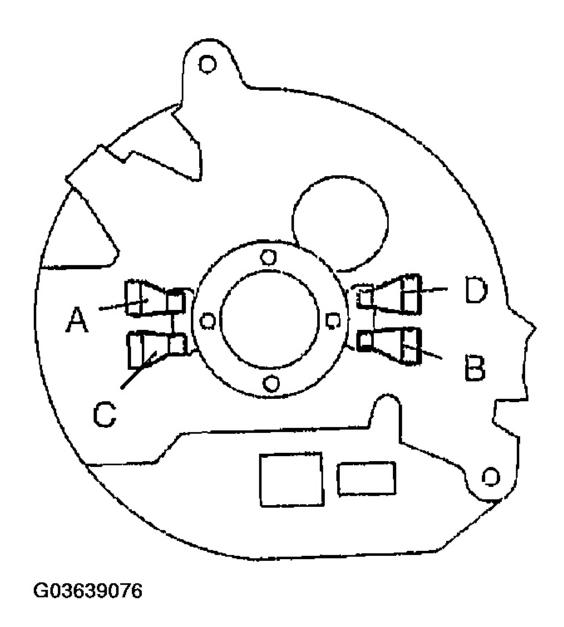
Identifying Tachometer Terminals Courtesy of MAZDA MOTORS CORP.
